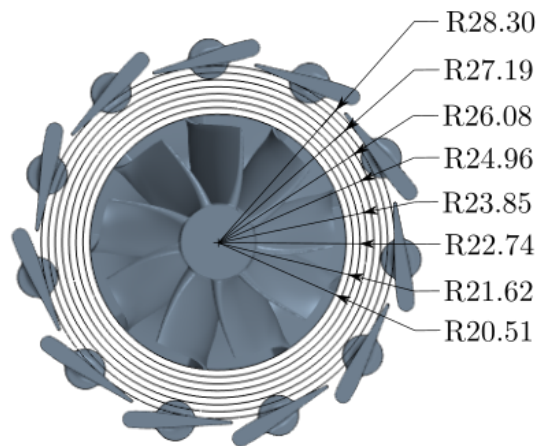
Turbine geometry with highlighted sections for following analysis. Dimensions in millimeters
